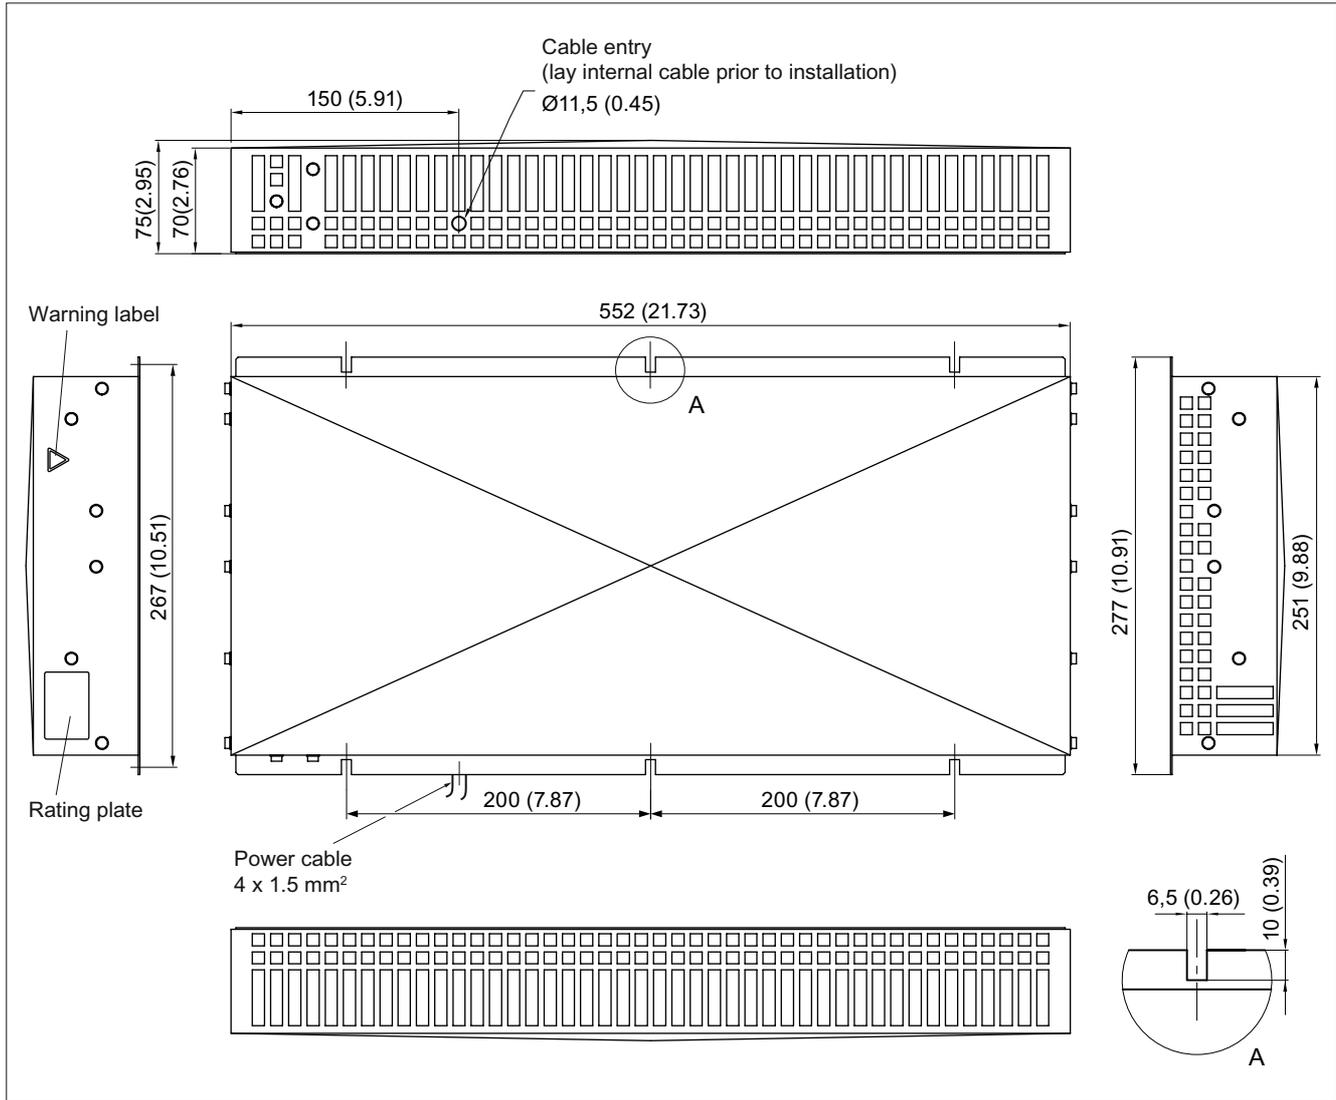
800 W damping resistor for HFD line reactors, all dimensions in mm and (inches)
